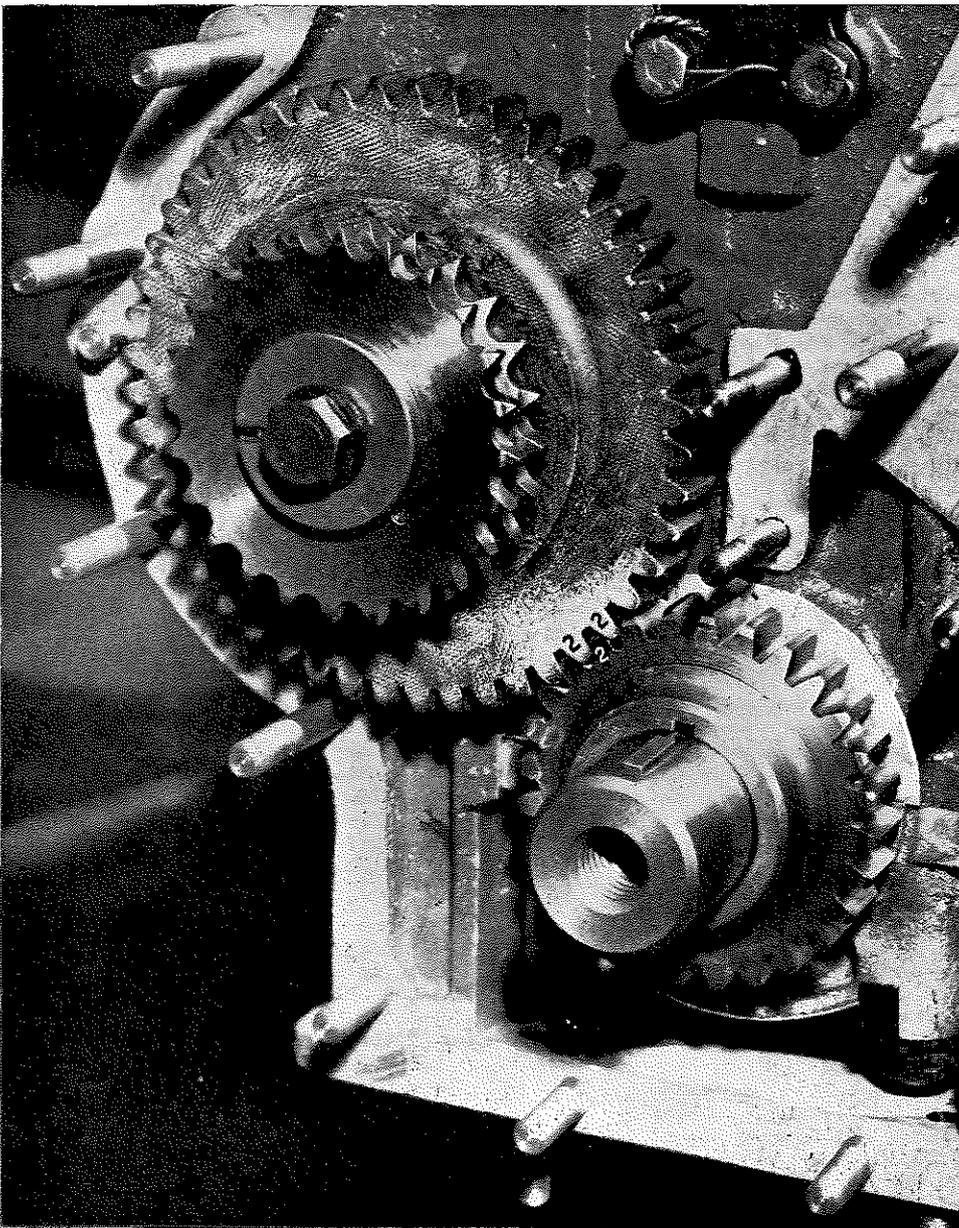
The crankshaft and jackshaft gears, showing the timing marks
